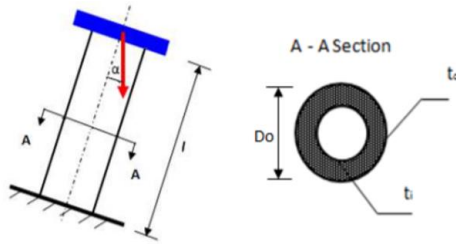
Dimensions, boundary, and loading condition of aluminum-foam-filled double tube
